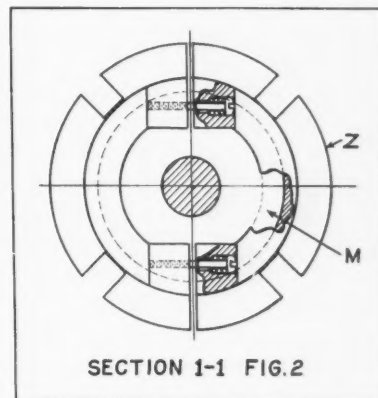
Details of Clutch *Z* and Disk *M* Which Lock Sun Pinion *W
